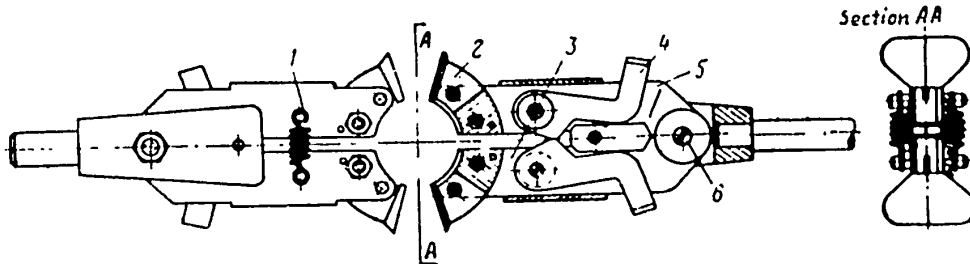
Holding the winding Machine with Two Pairs of Guide Jaws
